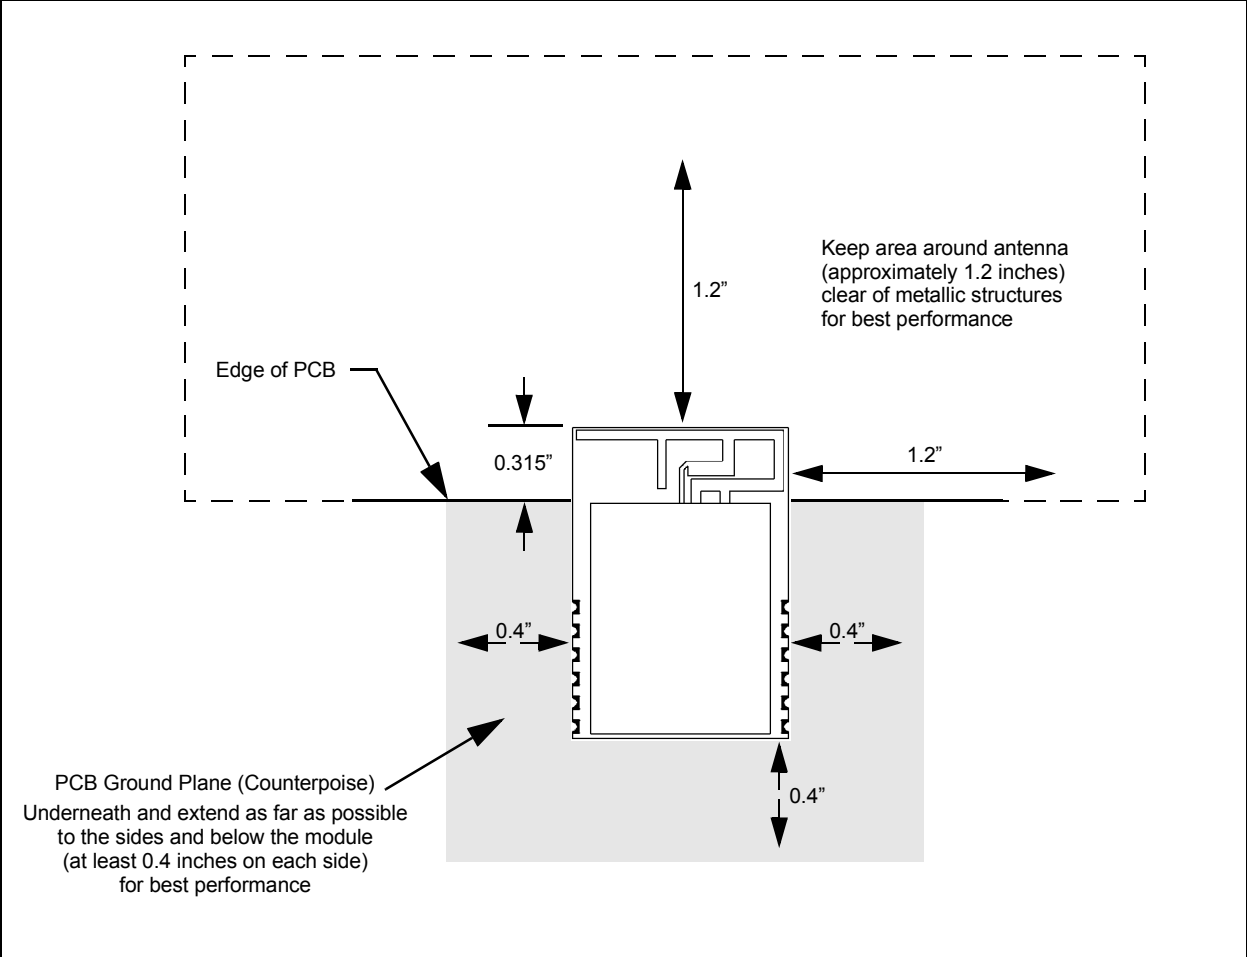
RECOMMENDED PCB FOOTPRINT
